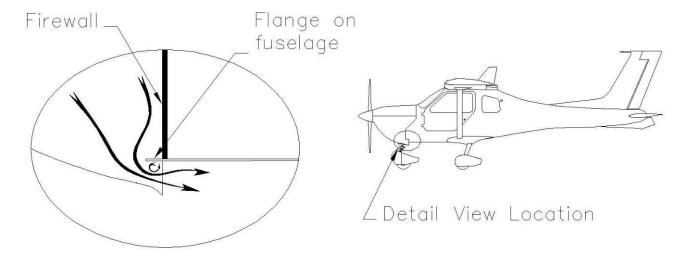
Outlet Restriction Caused By Flange On Lower Firewall
